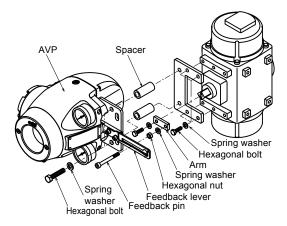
Mounting Procedure for Double-Acting Rotary Cylinder Actuator
